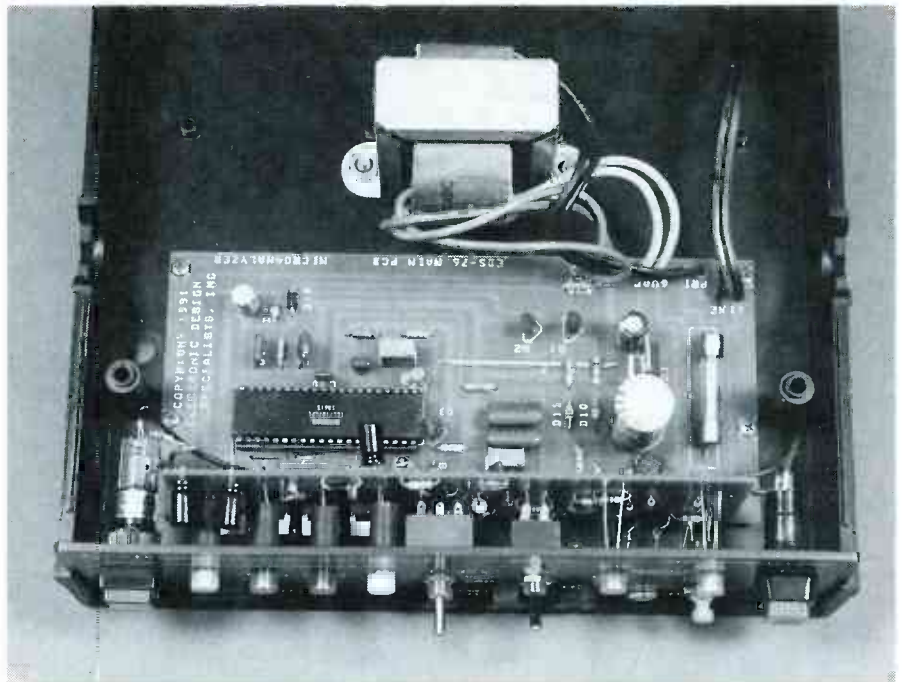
THE INSIDE OF THE COMPLETED UNIT. The transformer and PC-board assembly are mounted in the bottom shell.
